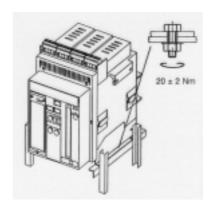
/7 Fixed mounted circuit-breaker mounted on a frame
